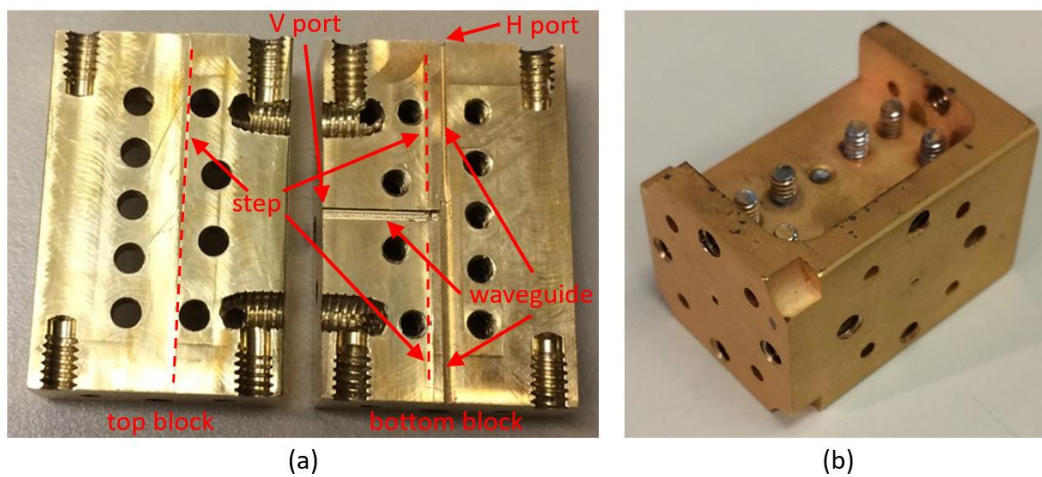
(a) The two brass blocks on which the OMT has been milled. The tiny waveguide features are highlighted. (b) The completed gold-plated OMT.
